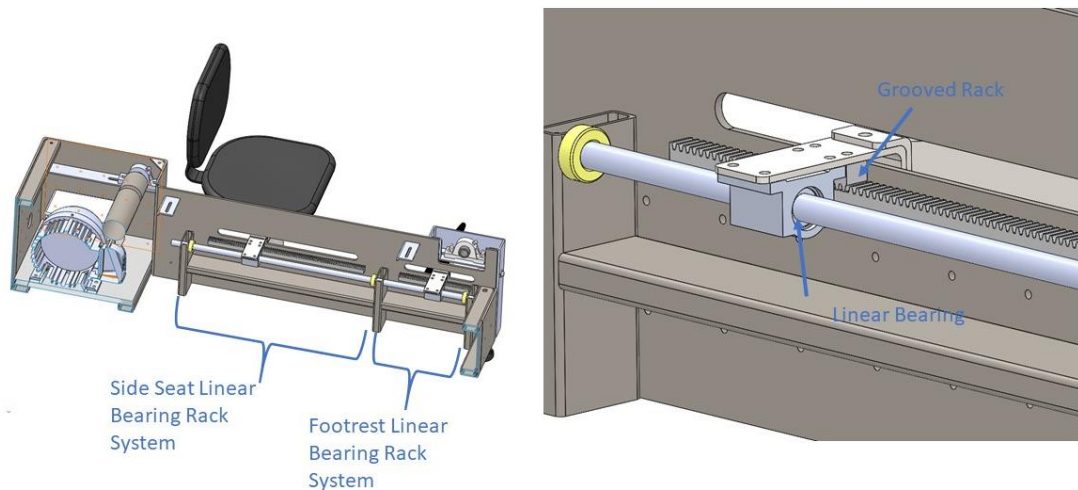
Seating and Footrest Linear Bearing and Rack System
